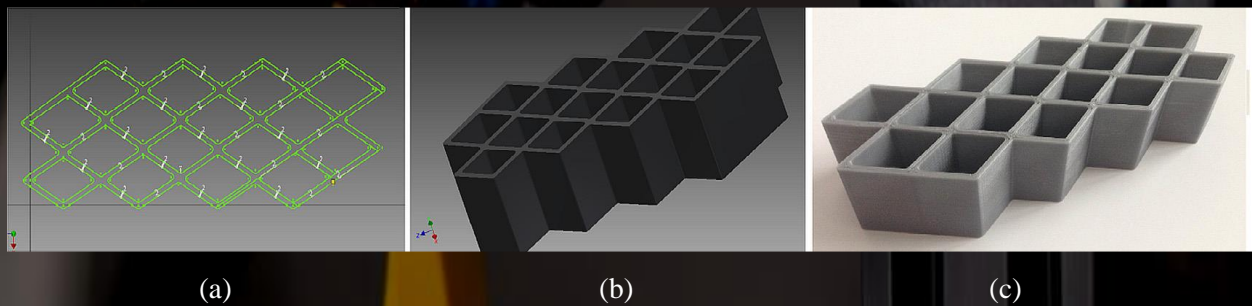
D sketch; (b) 3D model; (c) printed replica of a Canal House wall.
